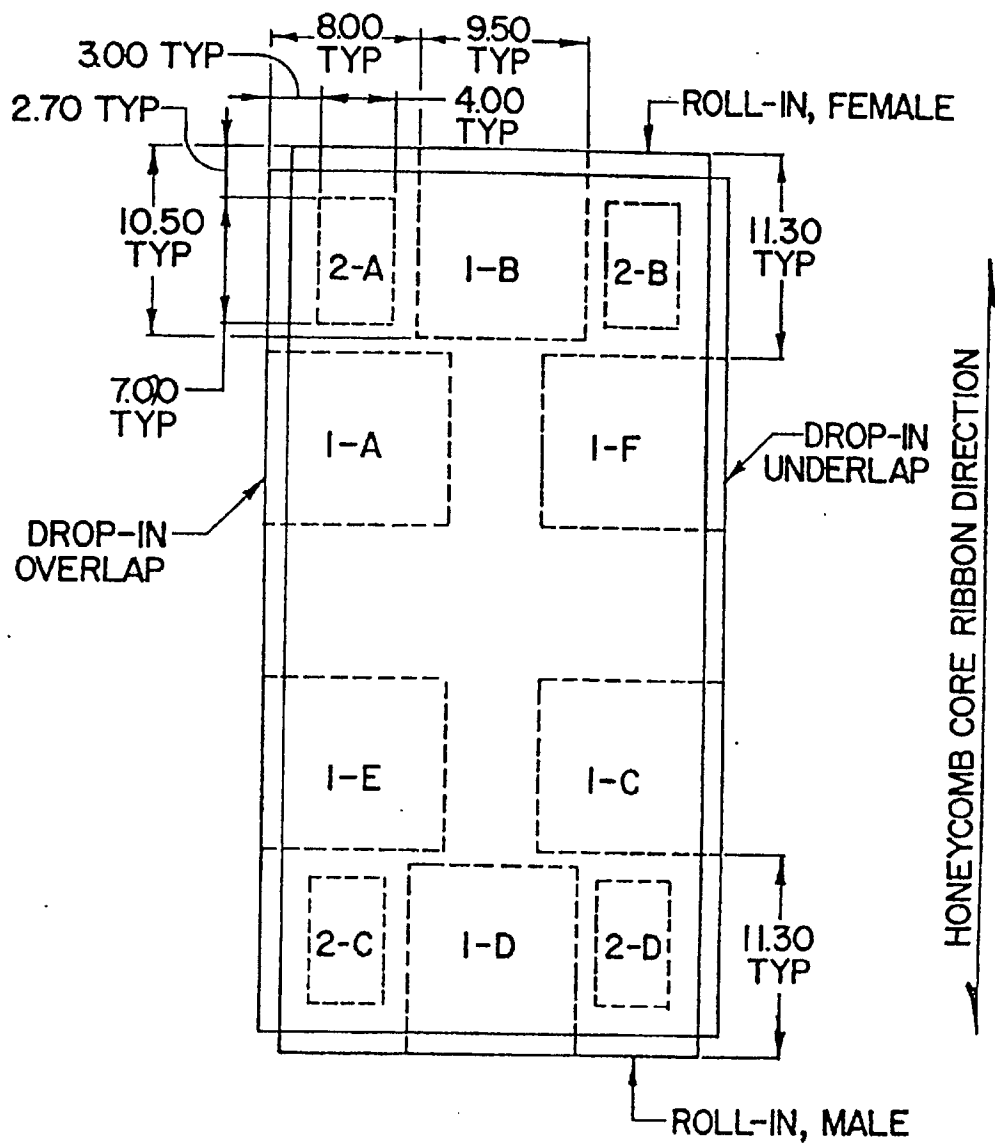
LOCATION OF TEST SPECIMENS FROM TYPE II MATS.
